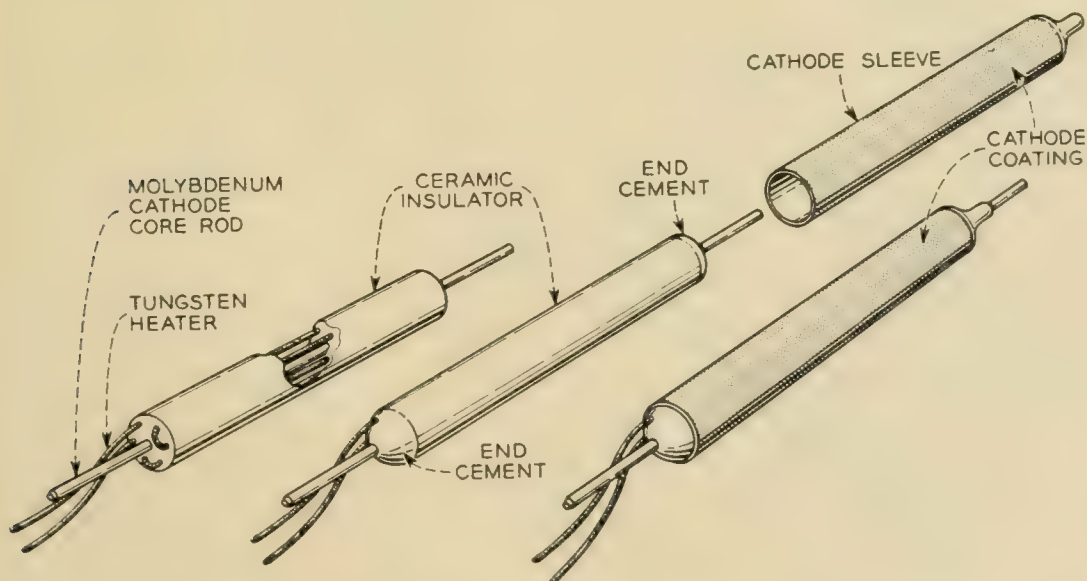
Heater, heater insulator and cathode assembly of the 175HQ tube.
